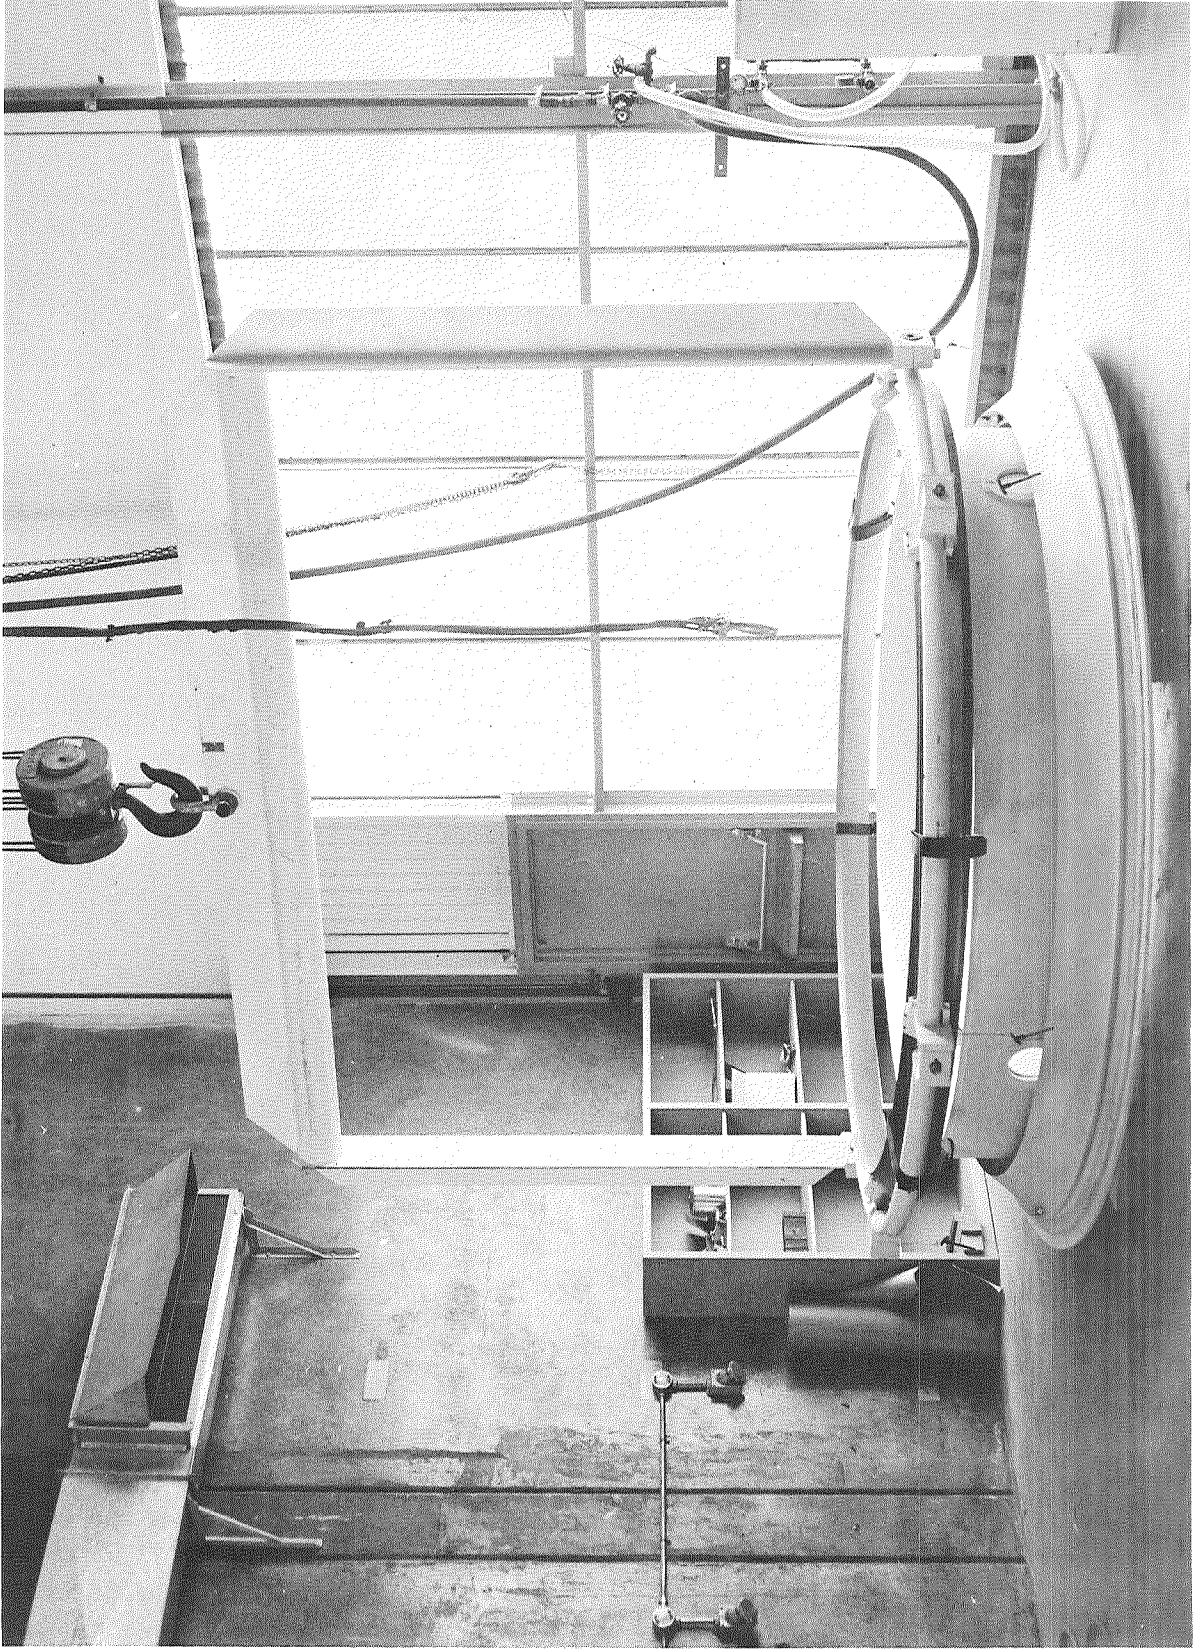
Position Steel Shim on Assembly Bond Fixture
